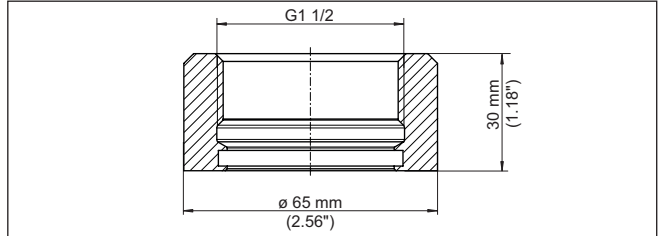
Dimensions of welded socket, thread G1½ (ISO 228-1) - Hygienic design
